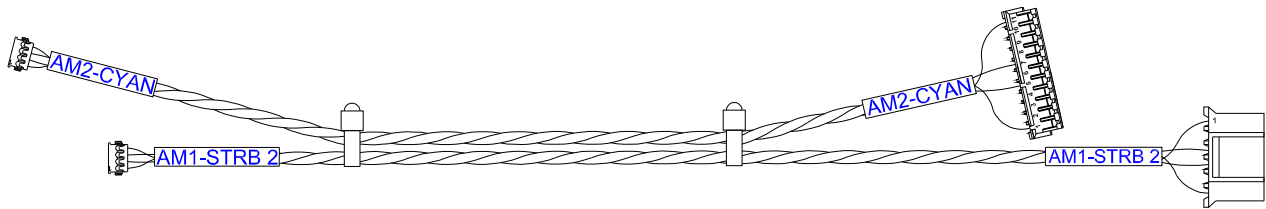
VL4000 Color Bulkhead 2 Cable Assembly
